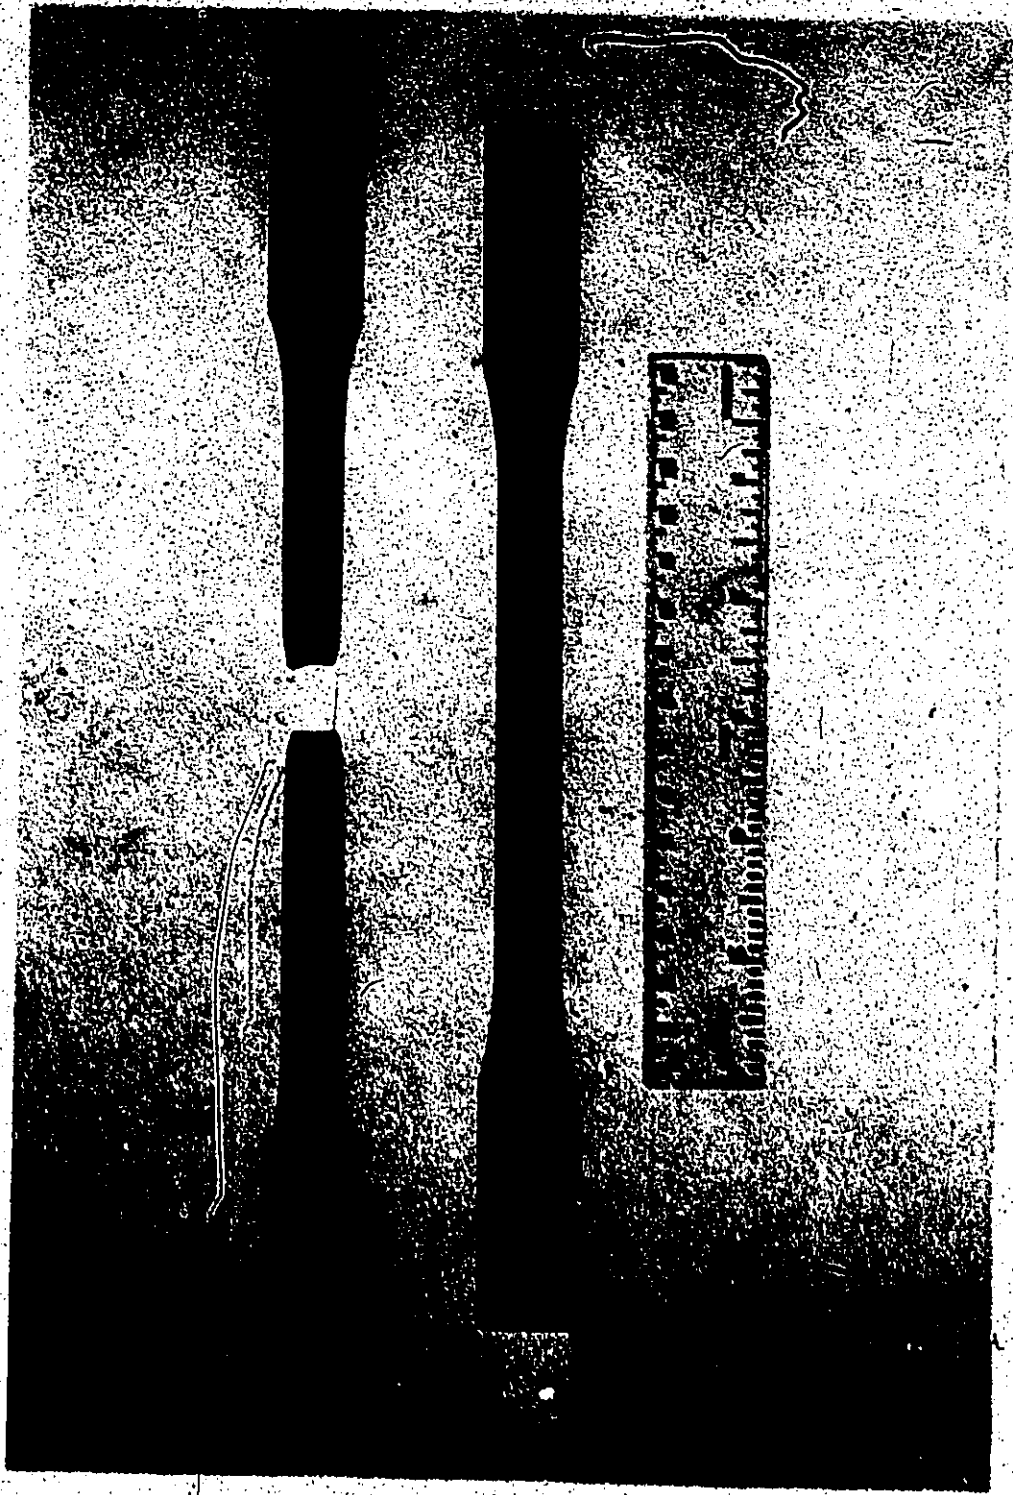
Photograph Showing Tensile Test Specimens, Before and After Fracture.
